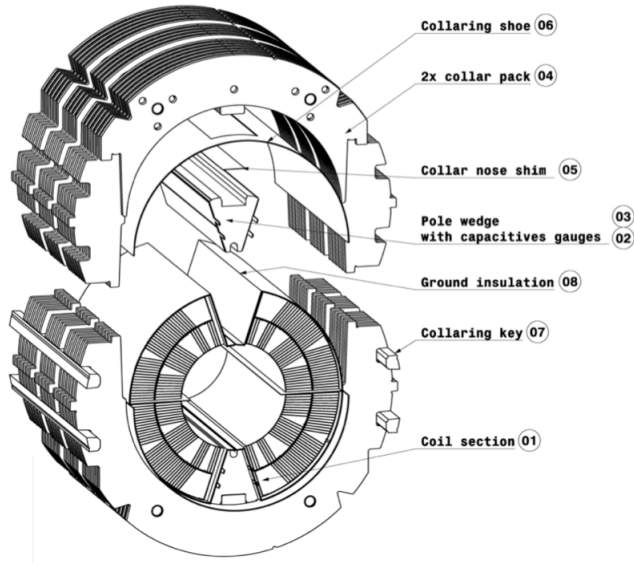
The collared coil assembly. The removable pole wedges can be seen. [30]
